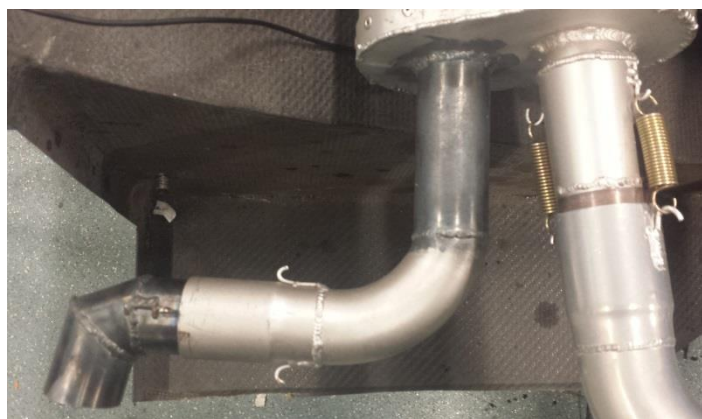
The mild steel muffler's extended rearward outlet, and 90° outlet tip connected via slip joint.
